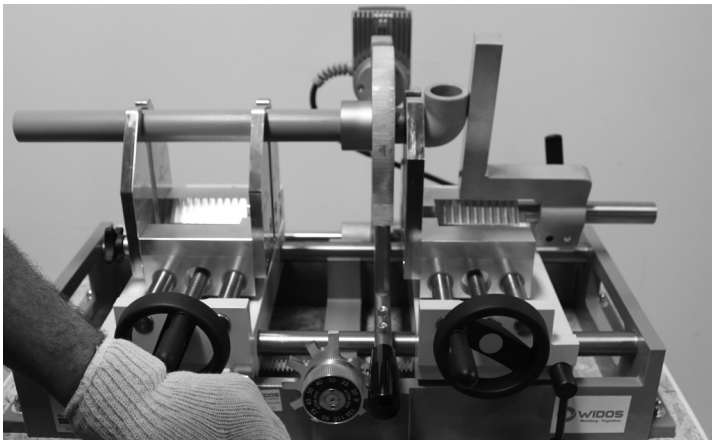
Move the machine slides with the handle lock, warm up the pipe and the fitting in the welding tools.
